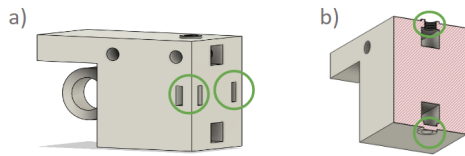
Connection part between connection module to the palm and index finger; a) Strings attachment points; b) Attachment points to the bearings.
